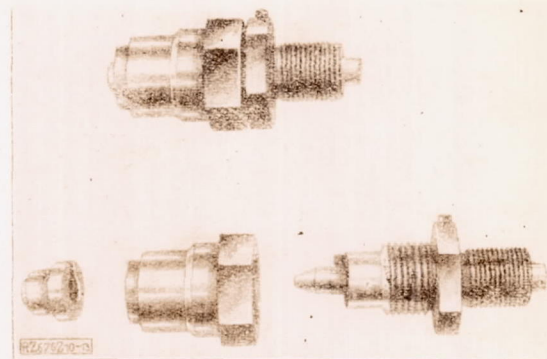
Nozzle of M.A.N. heavy-oil engine.
